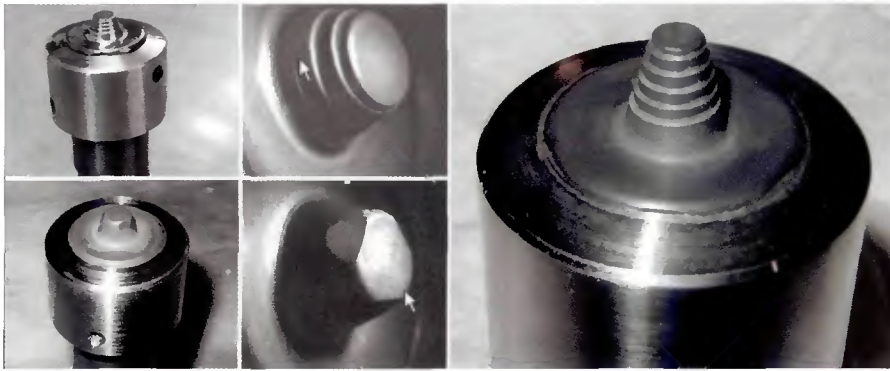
0.25 in. tapered with flats (left, bottom), 0.25-in. stepped spiral (left, top), and 0.500-in. stepped spiral high-temperature PCBN FSW pin tools. Courtesy of MegaStir, Inc.
